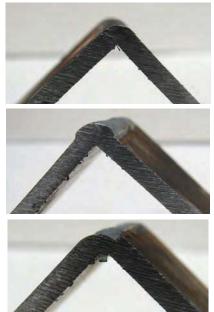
a) A good weld. b) An overfilled weld. c) An under-filled weld.
